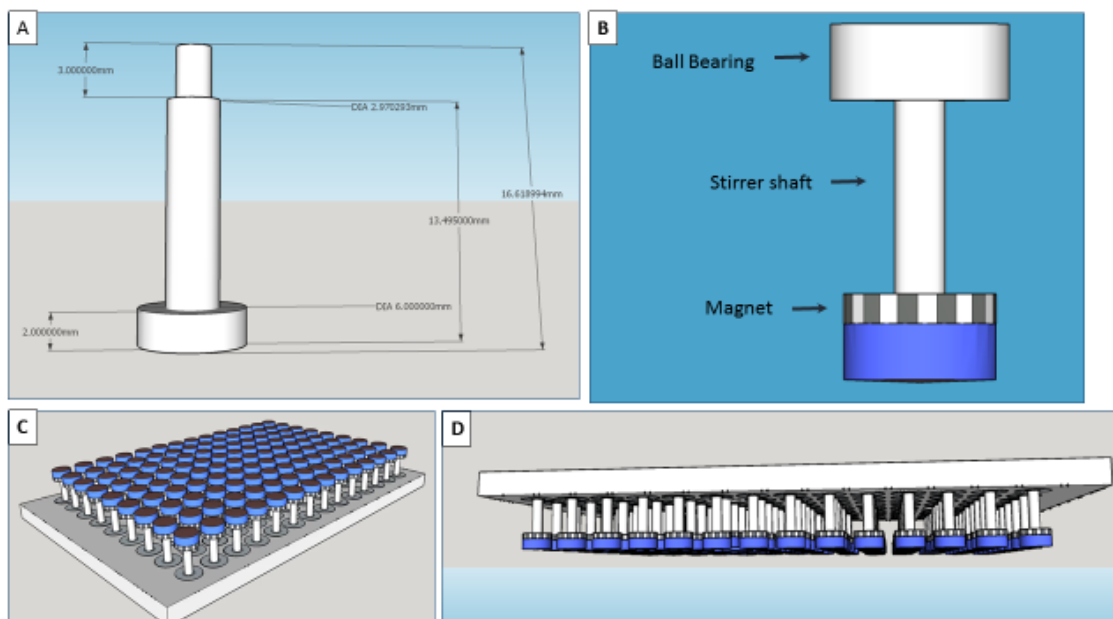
Mörs stirrers 2nd Prototype CAD drawing
